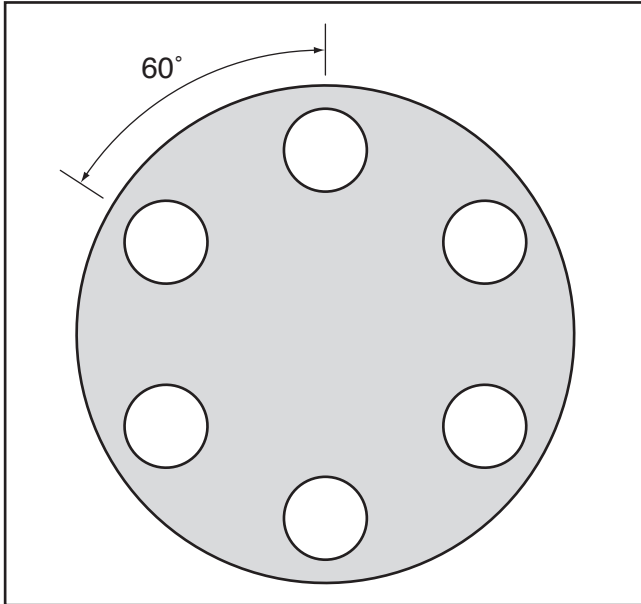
Six evenly-spaced holes in a circular workpiece 60° apart.
